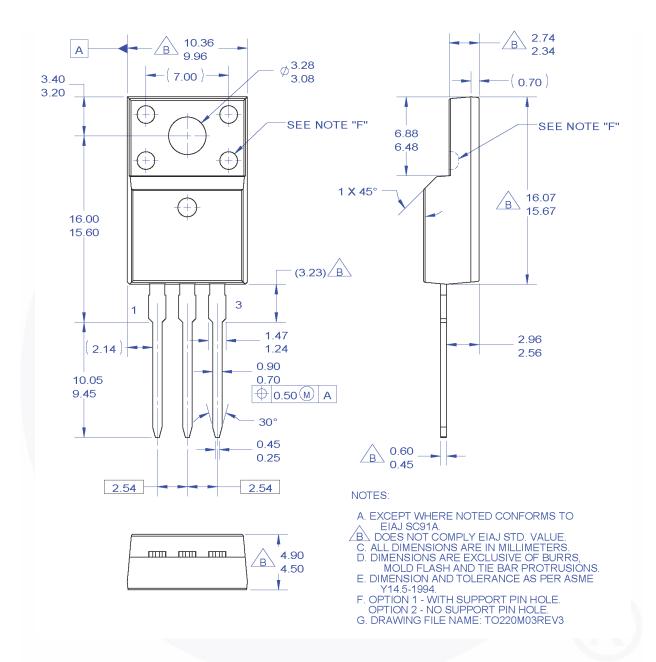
TO220, Molded, 3LD, Full Pack, EIAJ SC91, Straight Lead
